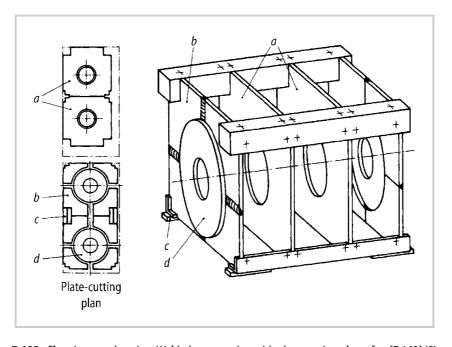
Electric motor housing. Welded construction with plate-cutting plan, after [7.162] (Siemens)
